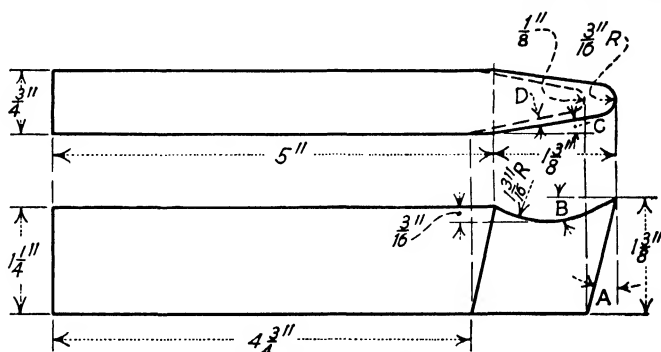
Recommended cutting angles for machining Hy-ten-sl.
